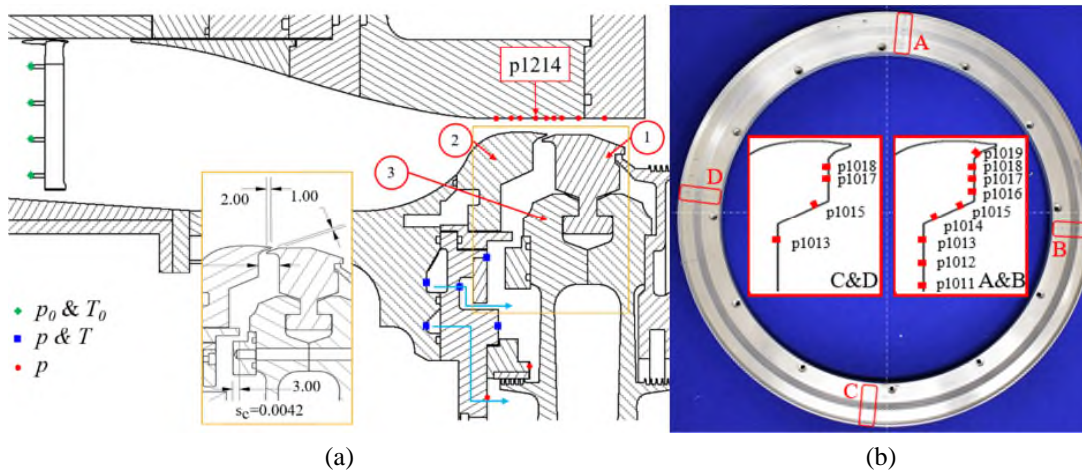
(a) Sectional view of ORF working section with measurement locations and chute seal geometry details, (b) Rim seal cavity measurement positions.
